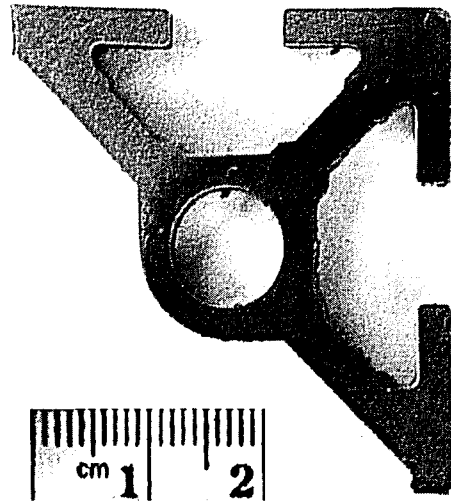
Section of a complex extrudate containing a longitudinal weld.
